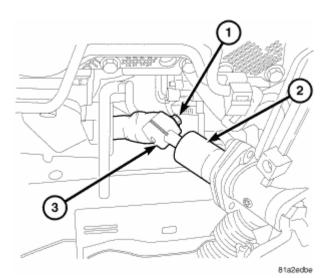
Identifying Power Steering Lines & Gear Courtesy of CHRYSLER LLC
